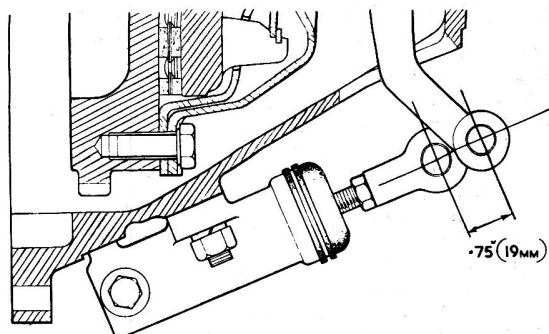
Setting dimension - Hydrostatic slave cylinder
